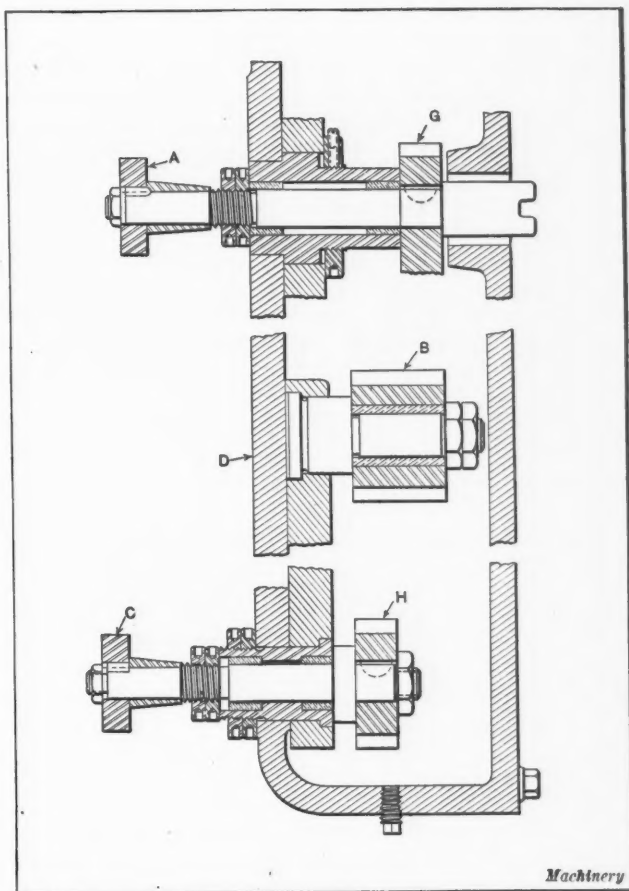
Sectional View through the Gear Centers, showing Construction of Drive for Two-cutter Milling Head
